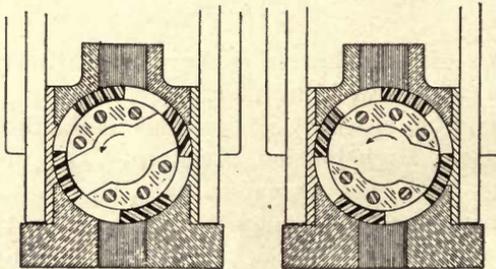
Shifting polepieces of Pittsfield magneto.
